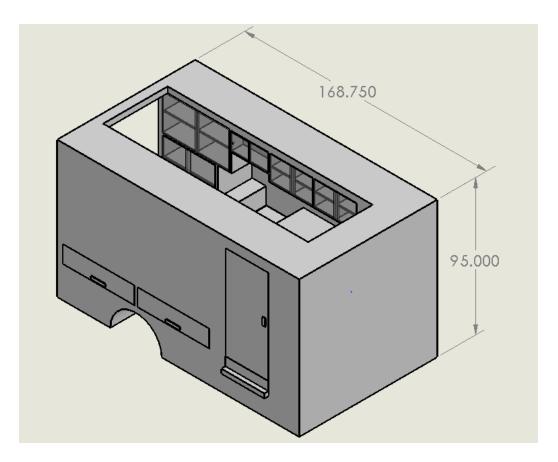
Complete SolidWorks Drawing of Ambulance in Isometric View
